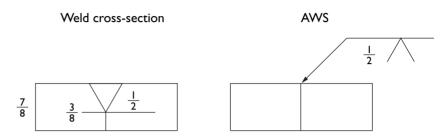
(g) and (h) indicate single-V and single bevel butt welds with broad root faces. These symbols are included in ISO 2553 but not in AWS A2.4–98. They are illustrated in Fig. 3.1 but best avoided, as described below.
